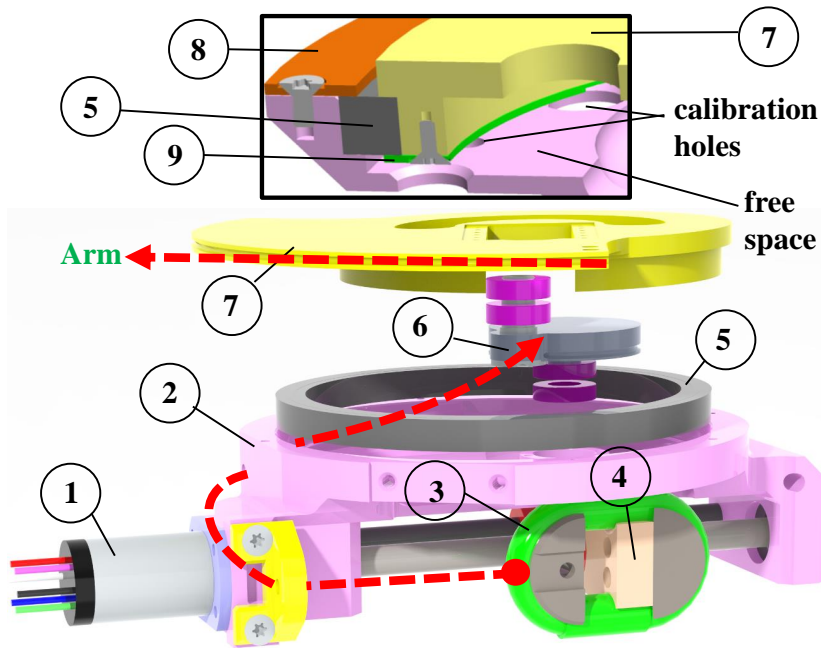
Mechanical design of the actuation system. 1- Motor, 2- Base, 3- Bungee, 4- Plate, 5- Spool bearing, 6- Pulley, 7- Spool, 8-Flange-1, 9-Flange-2. Tendon cable is illustrated with red dashed lines.
